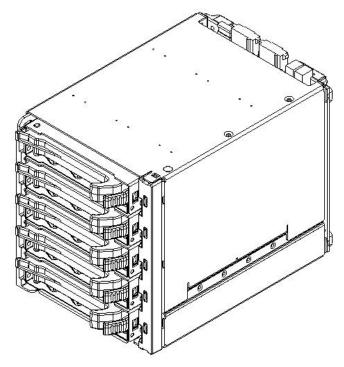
Hot-swap Drive Bay, Front Isometric View
